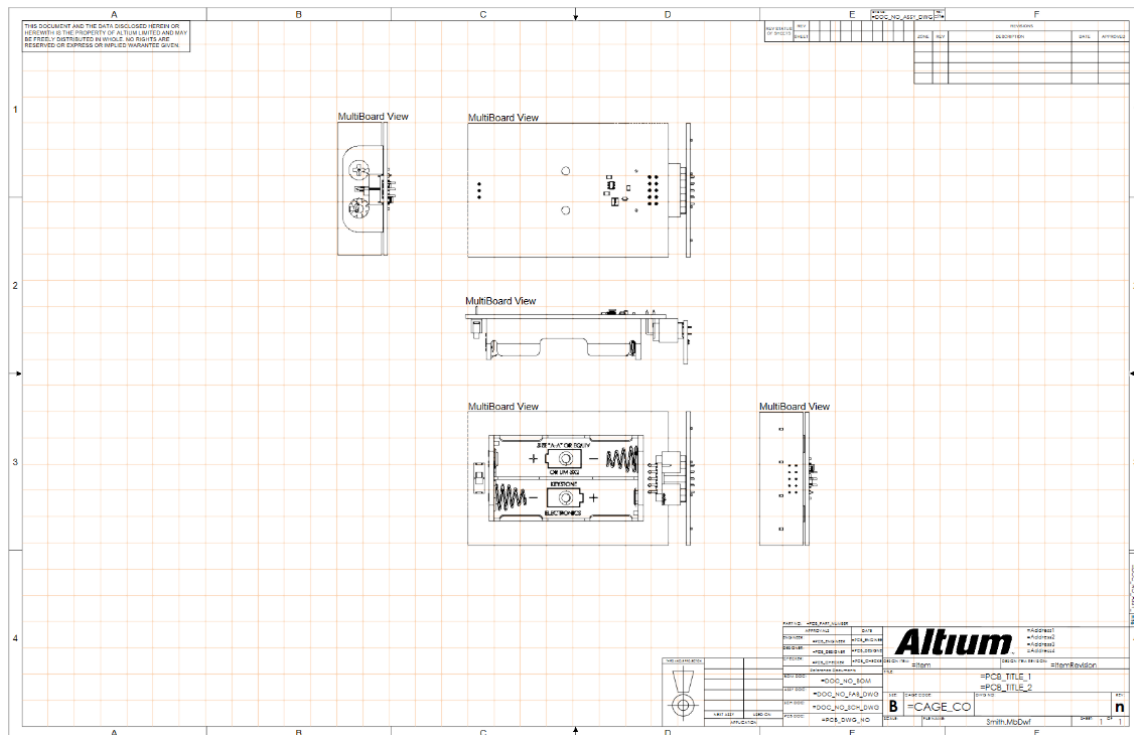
Example Draftsman Document with Multi-Board Assembly Views
